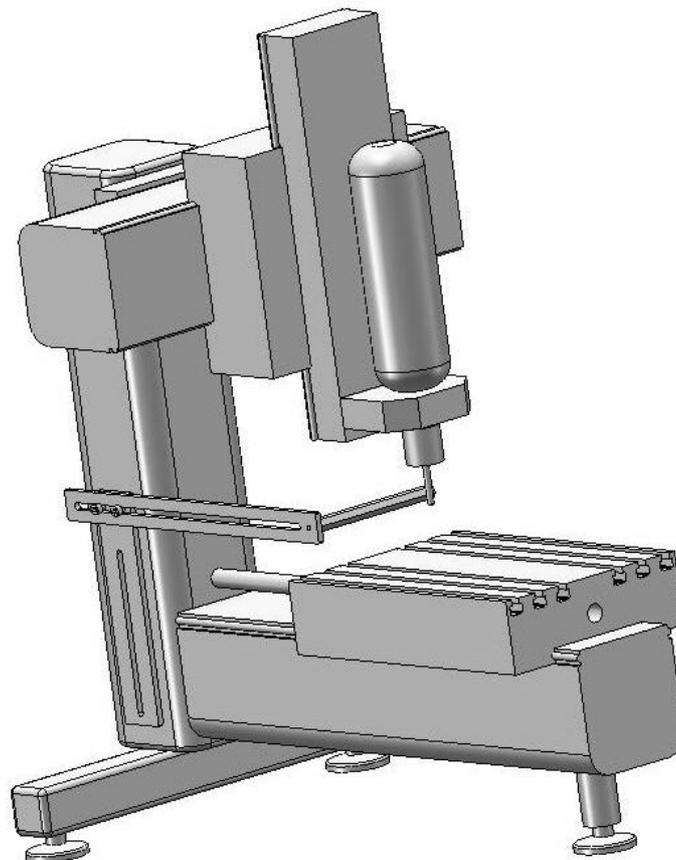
CAD model of LAKOS 150G desktop milling machine.
